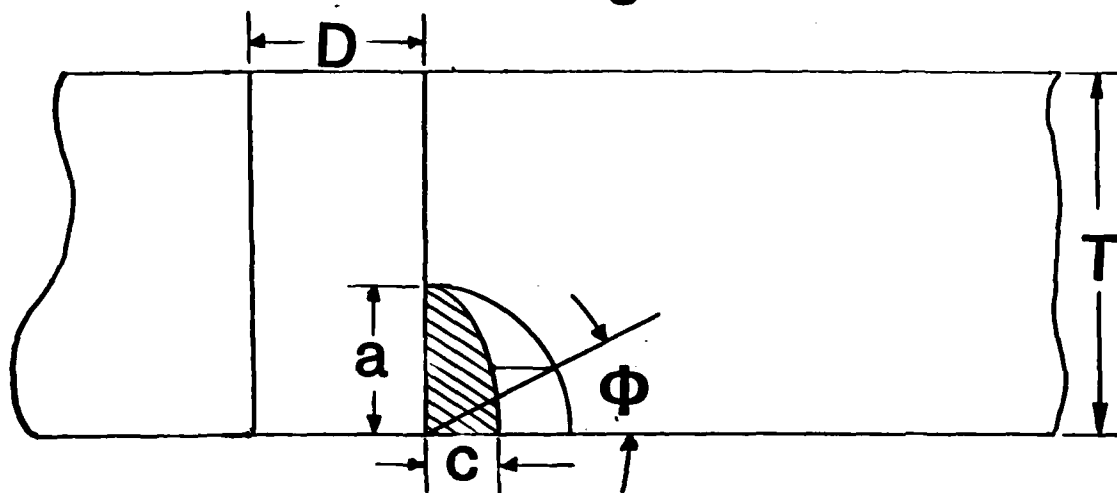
Schematic drawing of crack plane showing location of single and symmetric corner cracks located at bore of hole.
